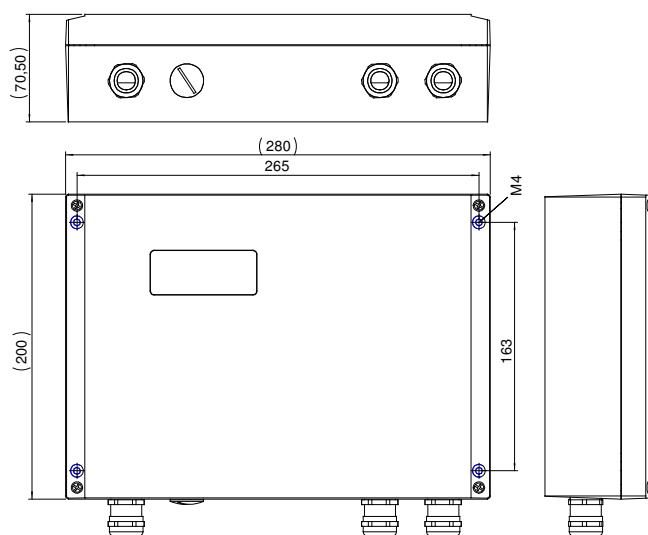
Dimensions of the housing, KATFLOW 120 (in mm)
